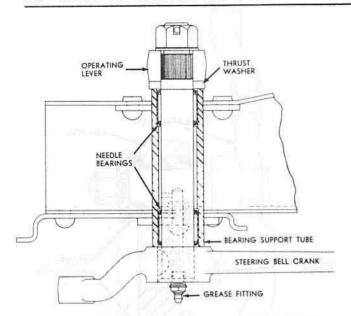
Construction of the Commander Steering Bell Crank and Shaft
